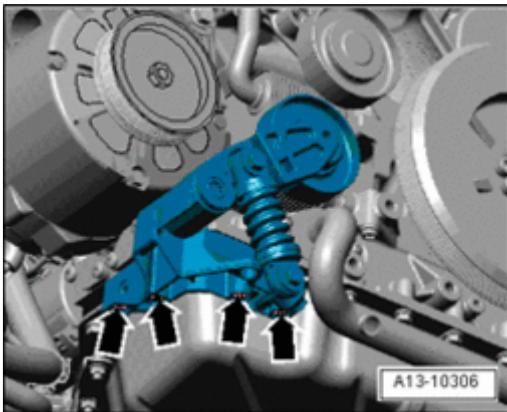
Removing Bolts & Ribbed Belt Tensioner At Upper Part Of Oil Pan
